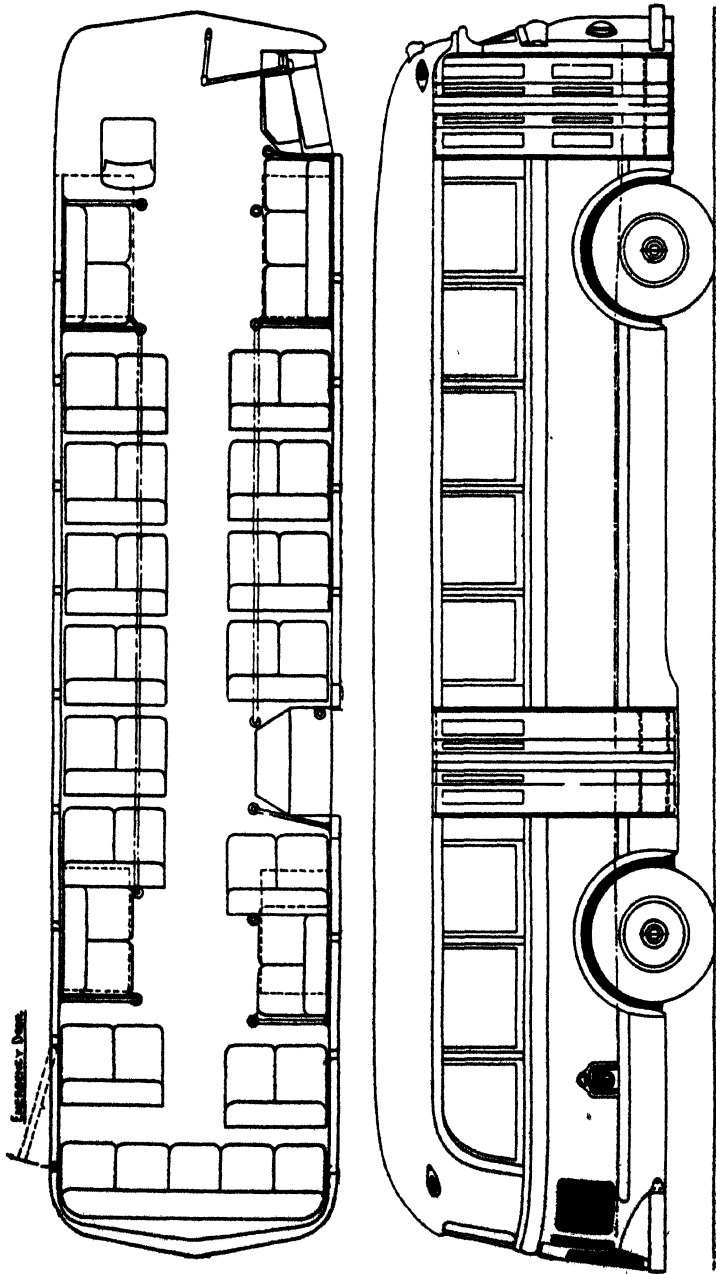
FLOOR PLAN AND SIDE ELEVATION OF WHITE 40-PASSENGER BUS, OF "INTEGRAL" CONSTRUCTION.
